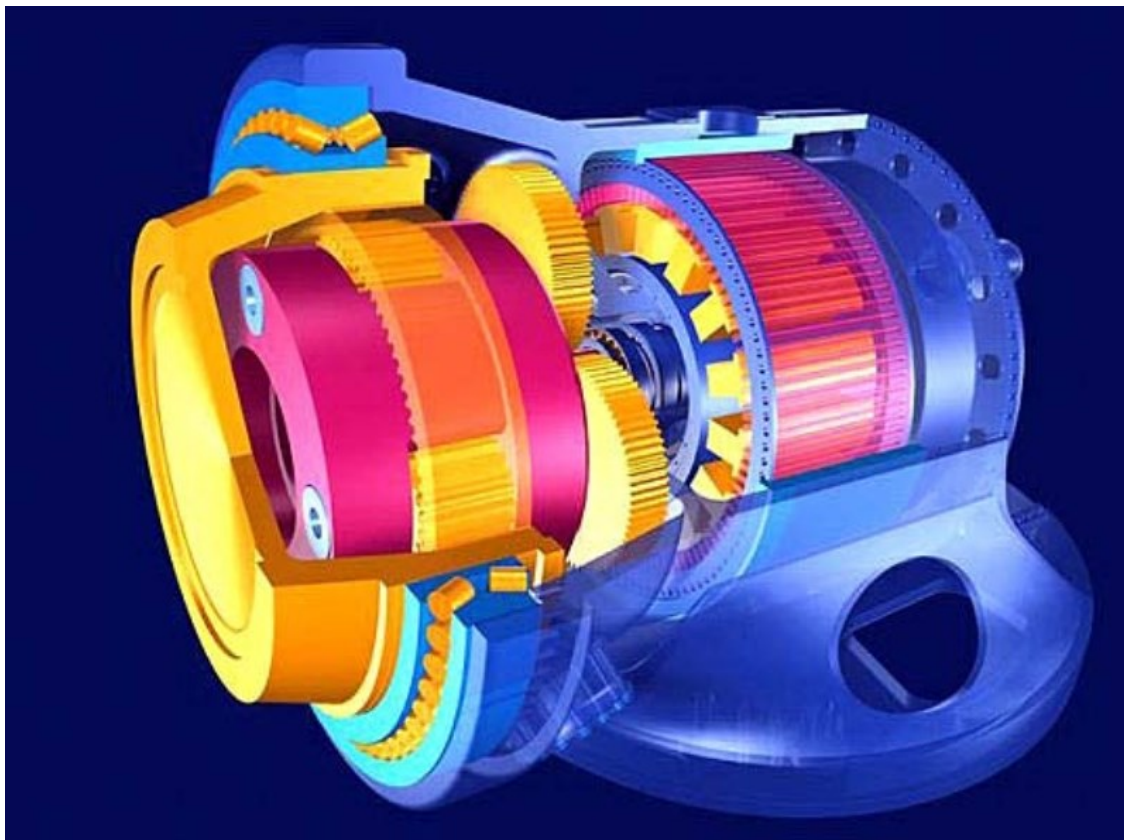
Rotor bearing, gearbox and generator assembly of M5000 wind turbine[6].
